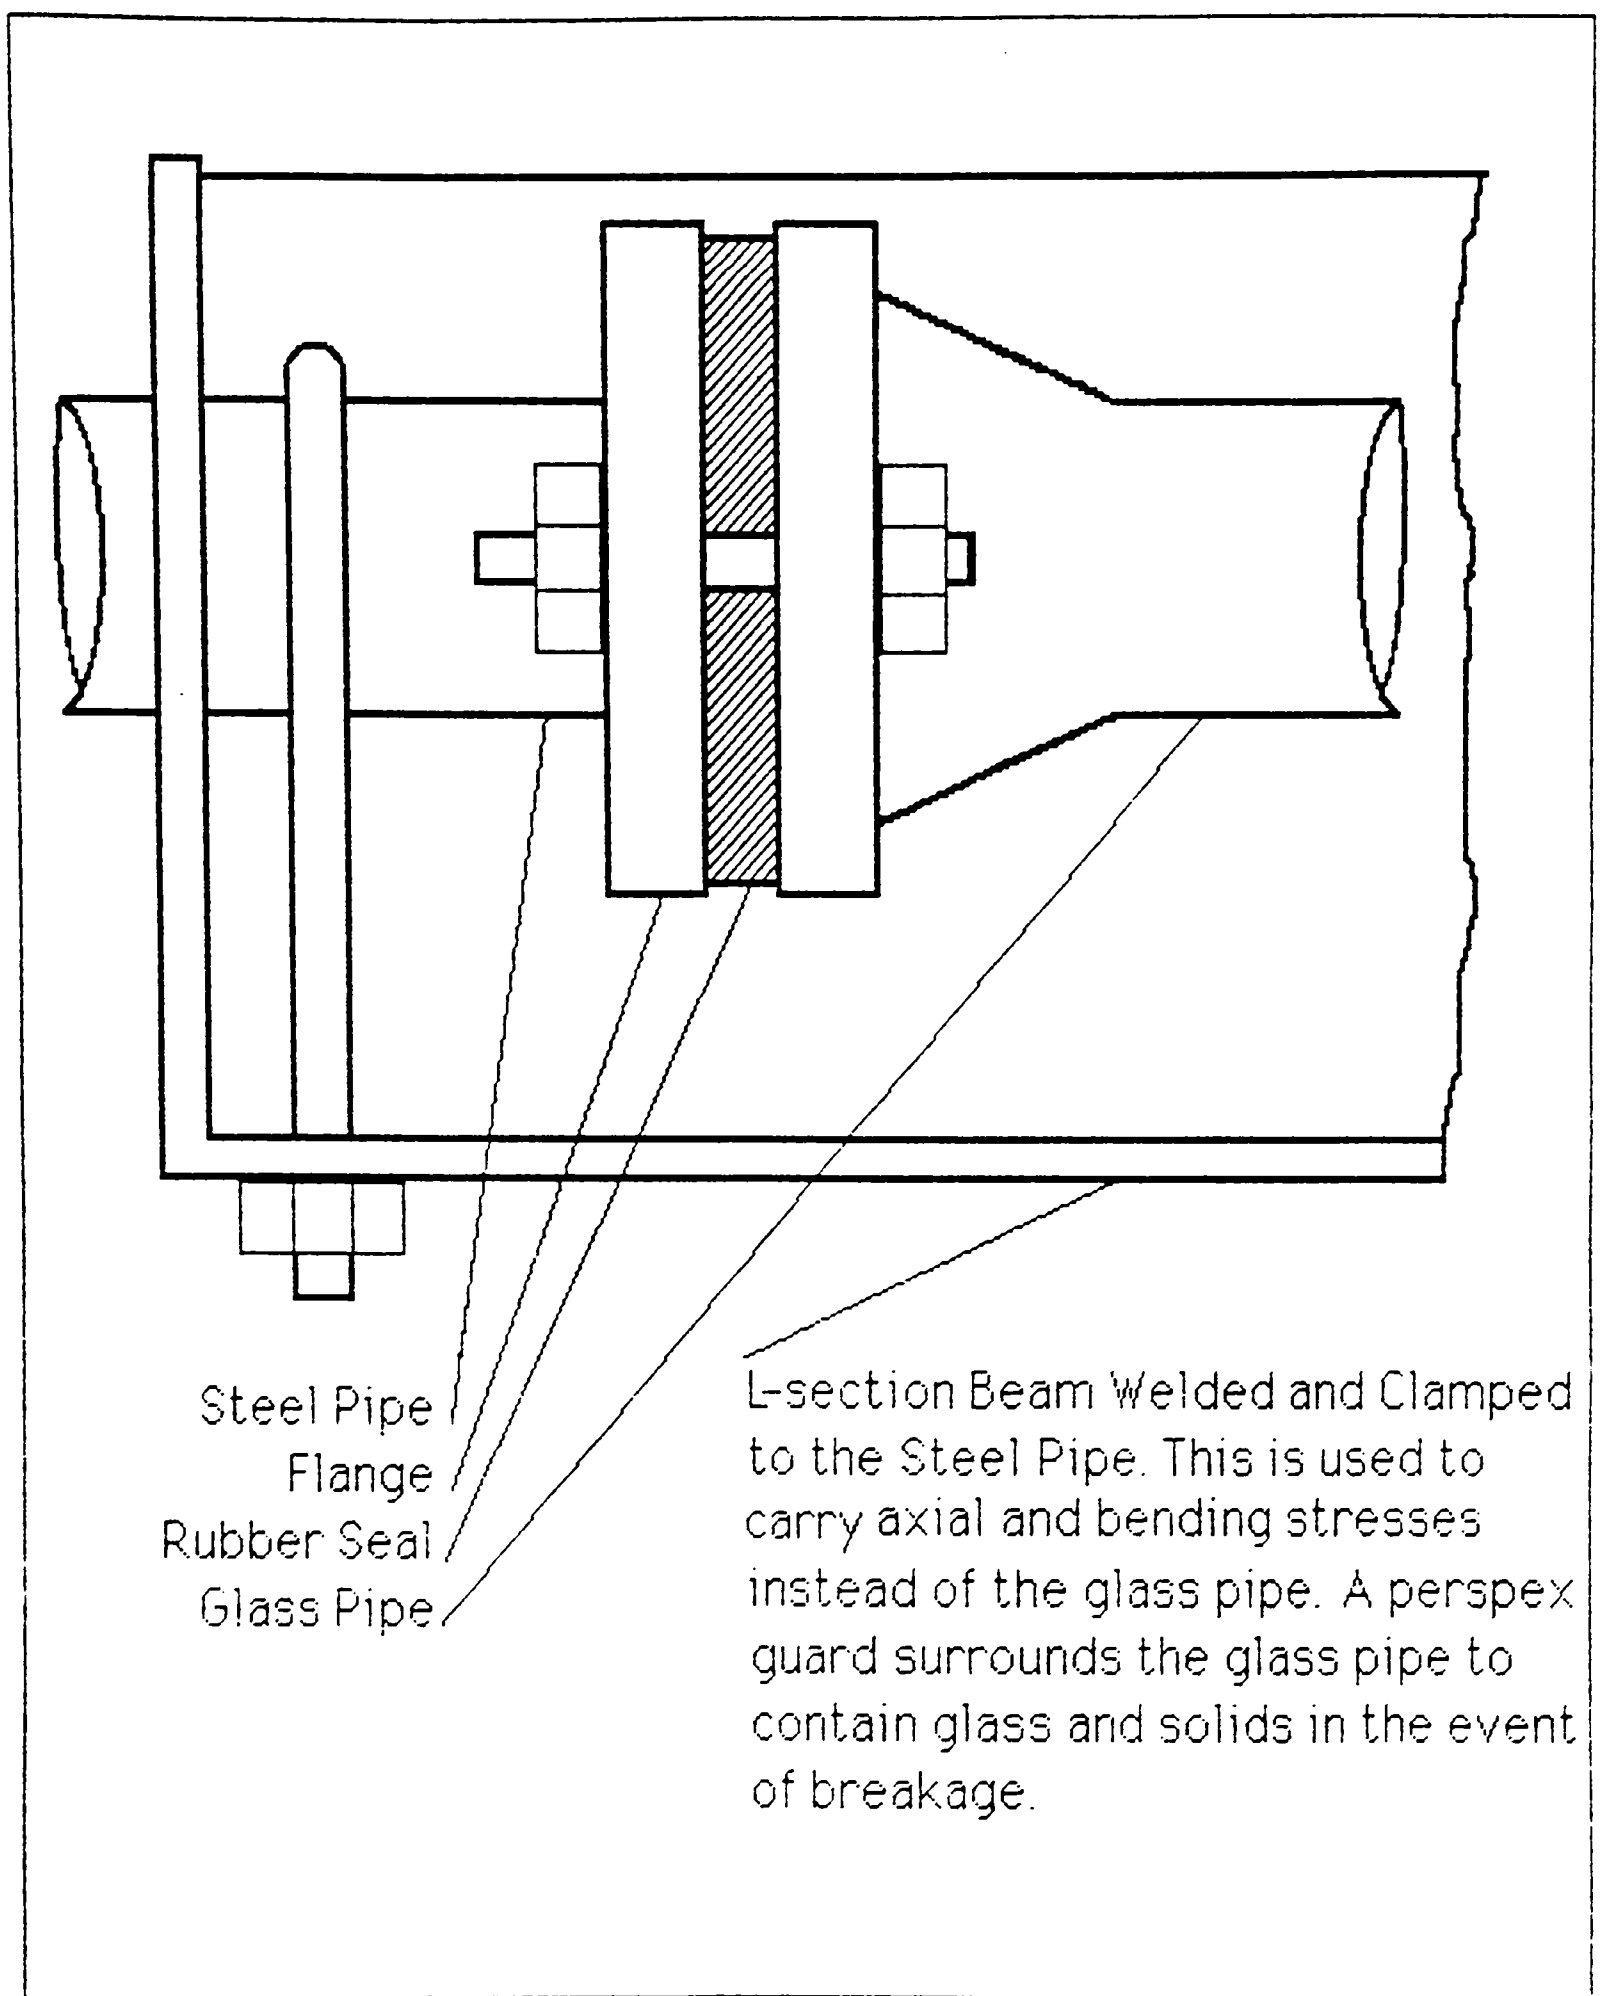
Construction Details of the Glass Pipeline Section.
